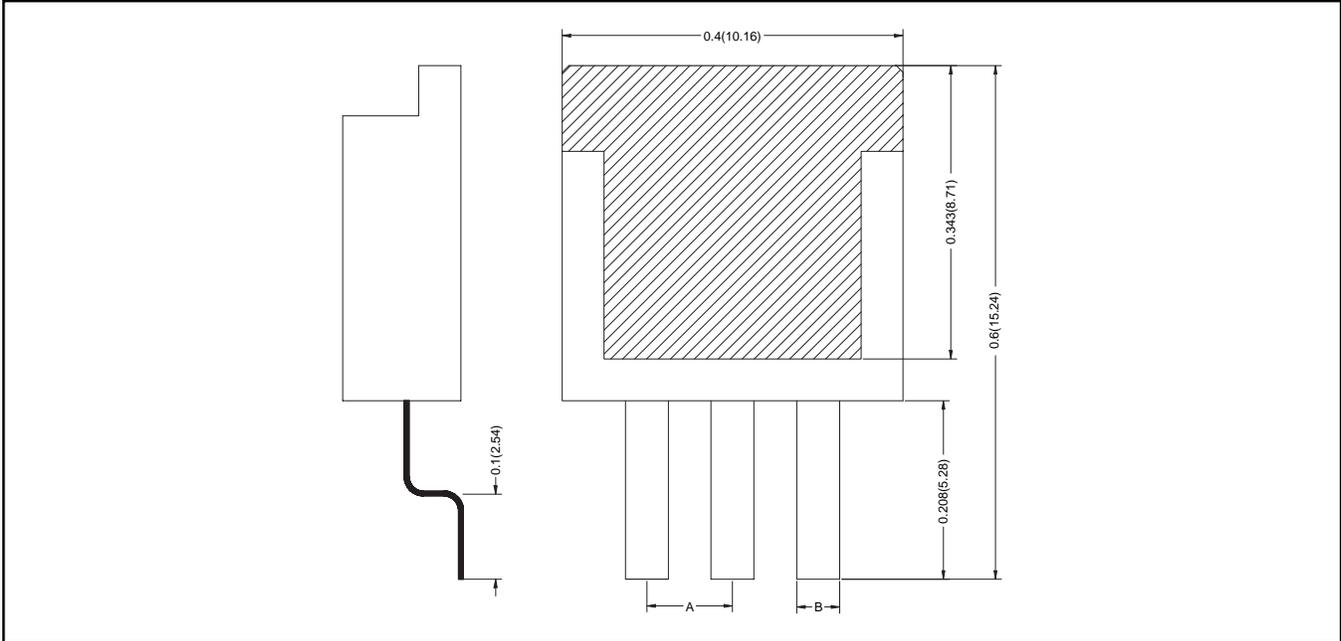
DDPAK Package Dimensions—Inches (mm).
